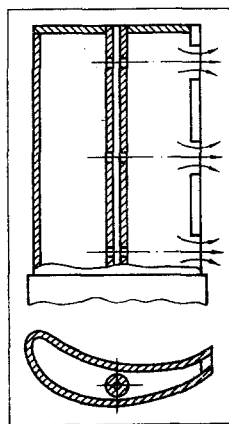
Nozzle blade which ensures the proper supply of air-liquid mixture.
